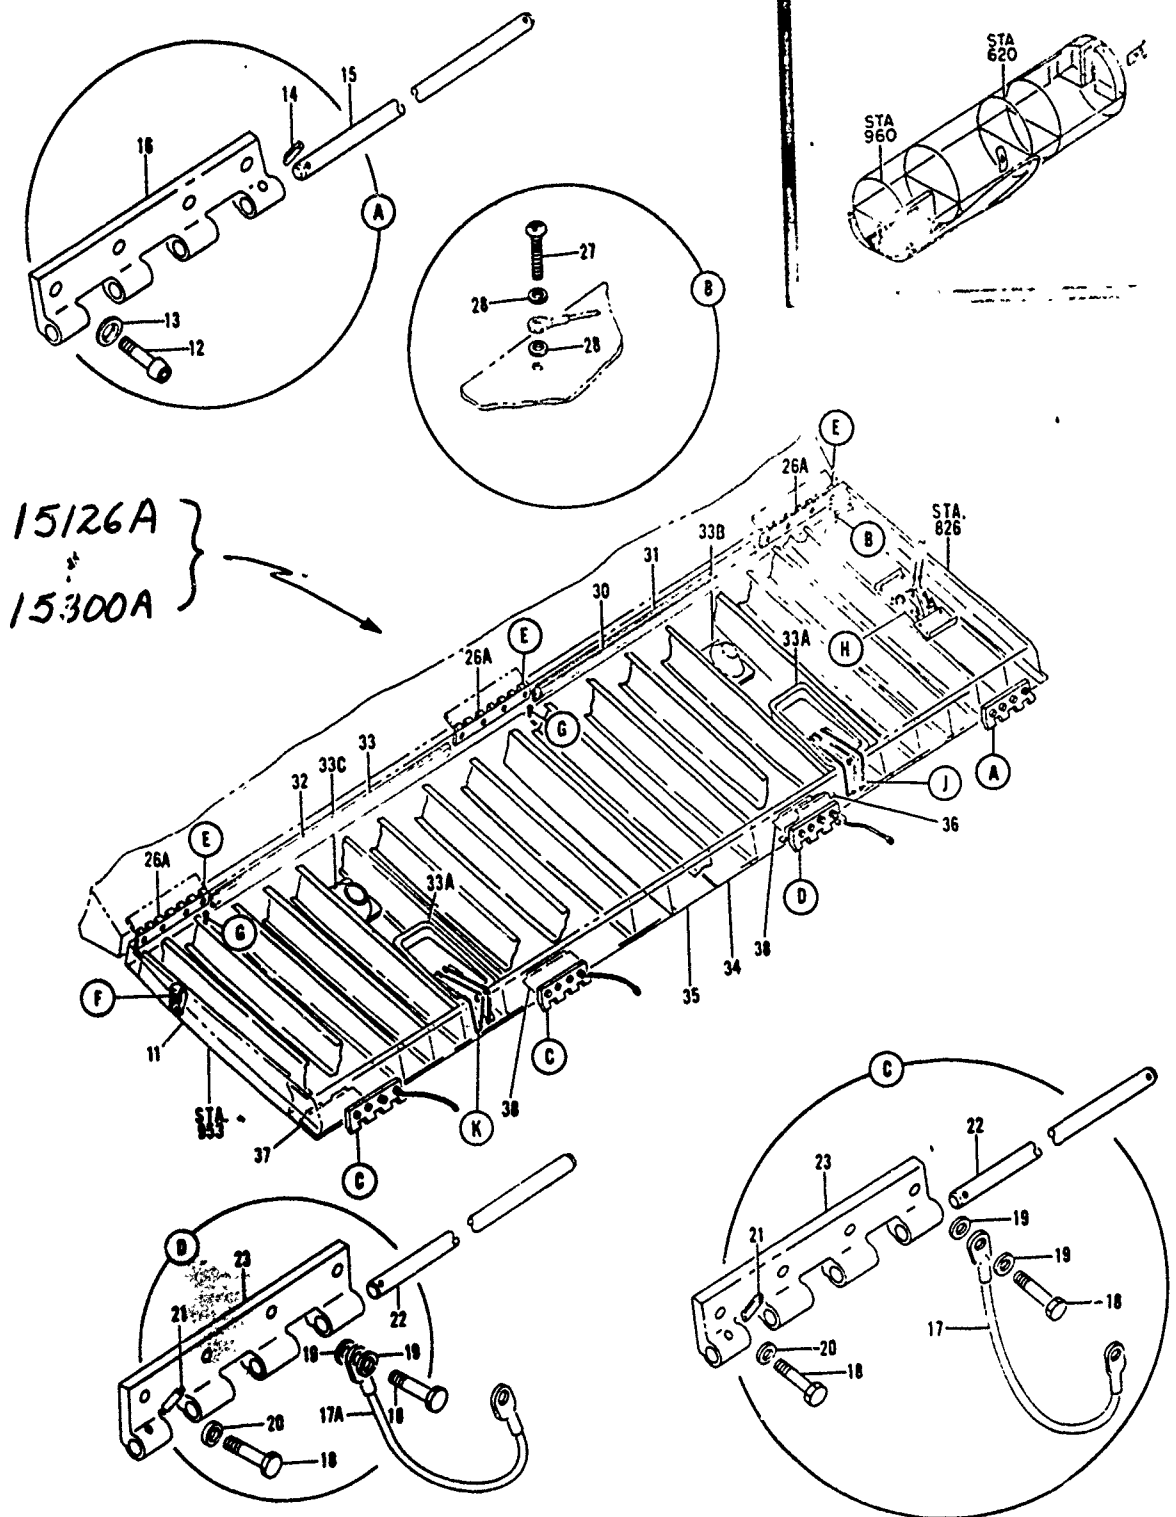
Main Gear Inboard Door Assemblies (Sheet 1 of 3)
